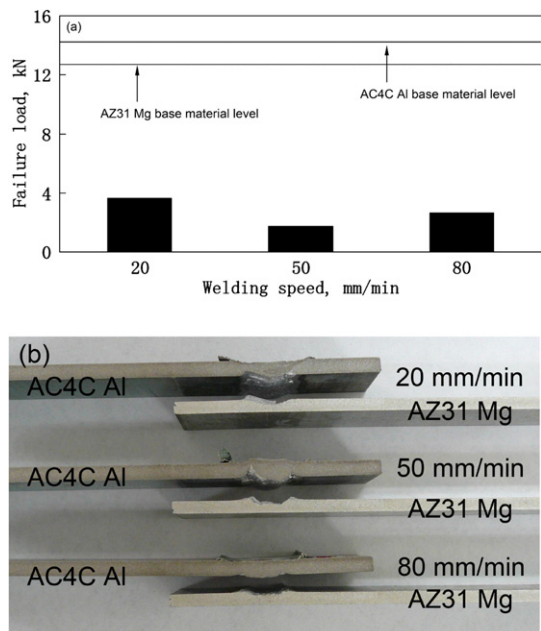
Failure loads and fracture locations of joints: (a) failure load, (b) fracture location.
